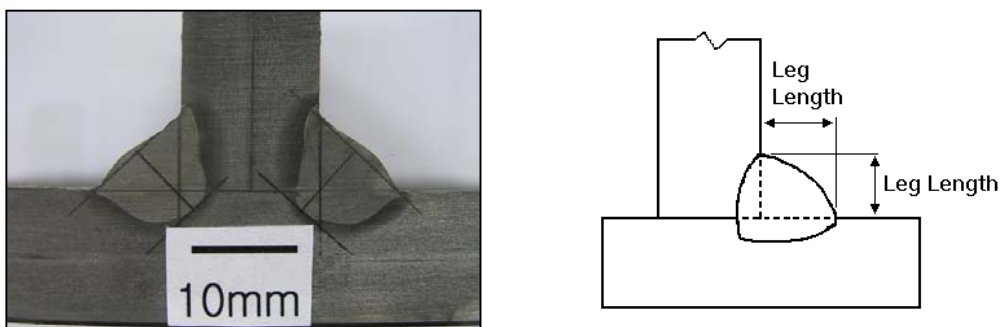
Penetration Test of Welding Bead Specimen
